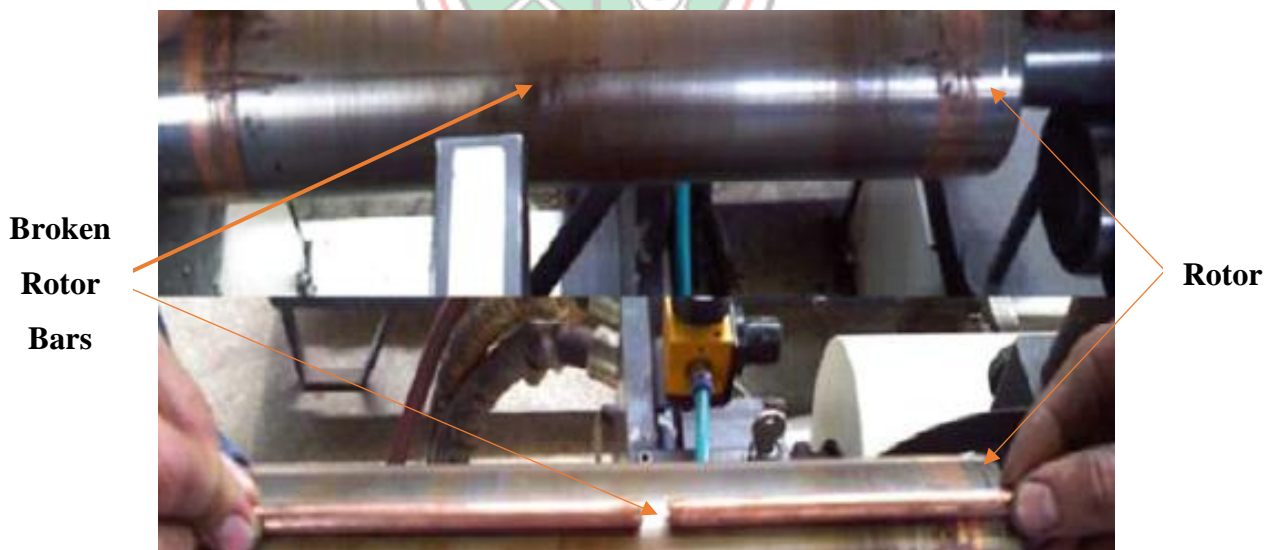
Photograph of Rotor and Parts of Broken Rotor Bars
